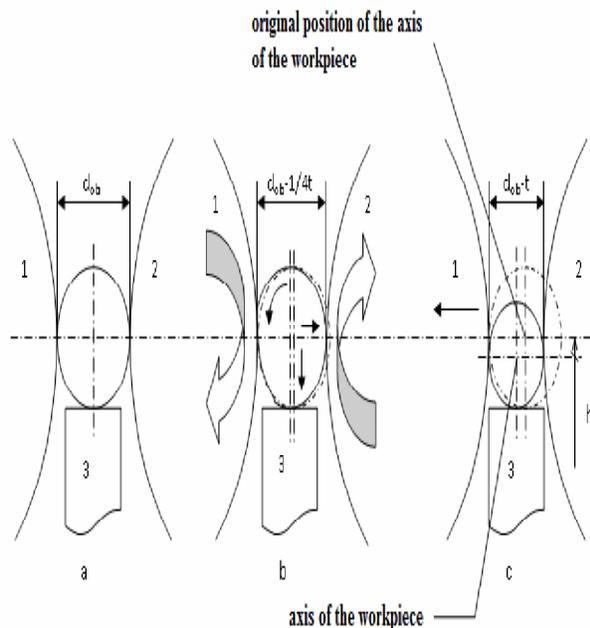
Scheme of instant positioning of the work piece when in-feed grinding (a. starting the process; b. intermediate position of the work piece; c. position after one revolution of the work piece; 1. grinding wheel; 2. regulating wheel; 3. leading slide).
